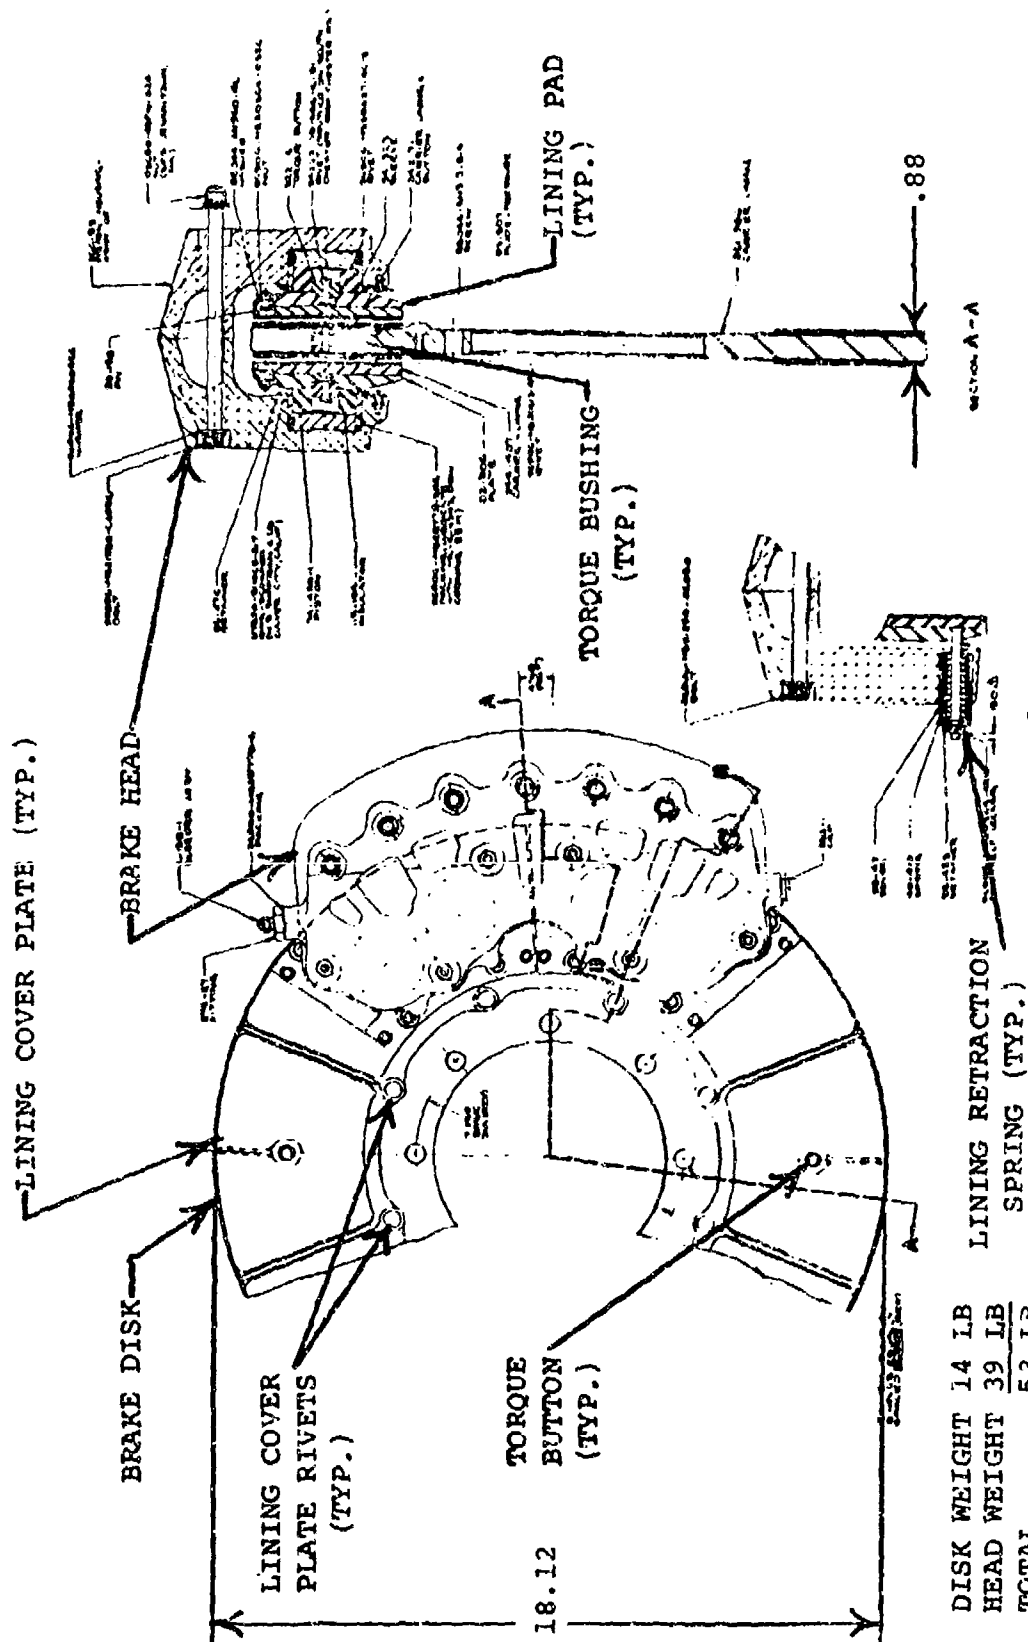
Metallic Lined Beryllium Brake Disk Assembly.
